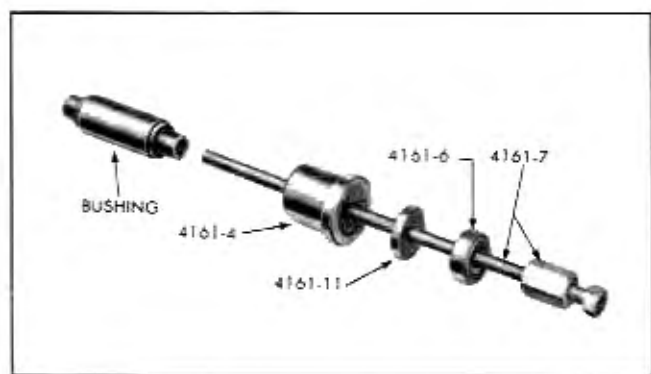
Rear Bushing and Components of Replacer Tool J-4161-A
